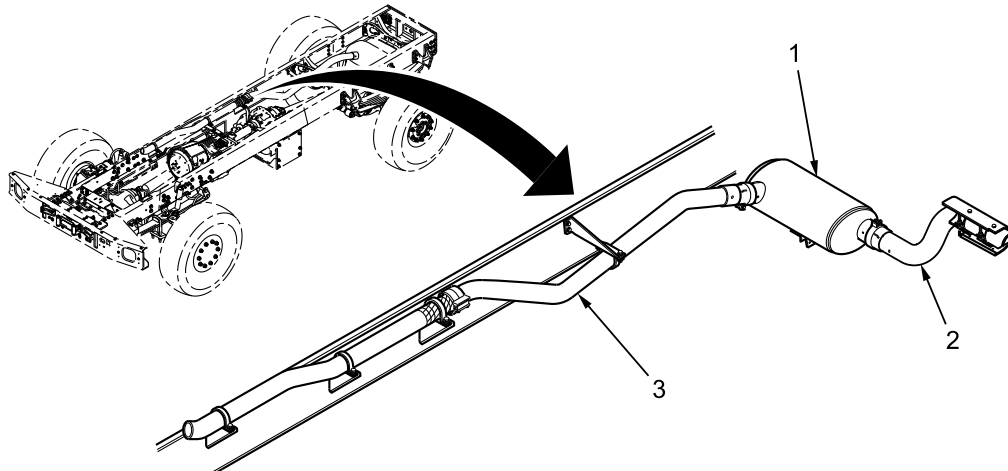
Exhaust Pipe, Muffler, and Tailpipe Assembly.
